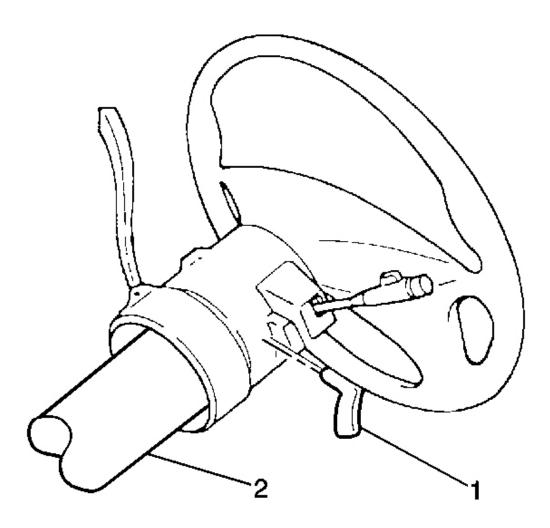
View Of Upper Steering Column With Tilt Lever Courtesy of GENERAL MOTORS CORP.
